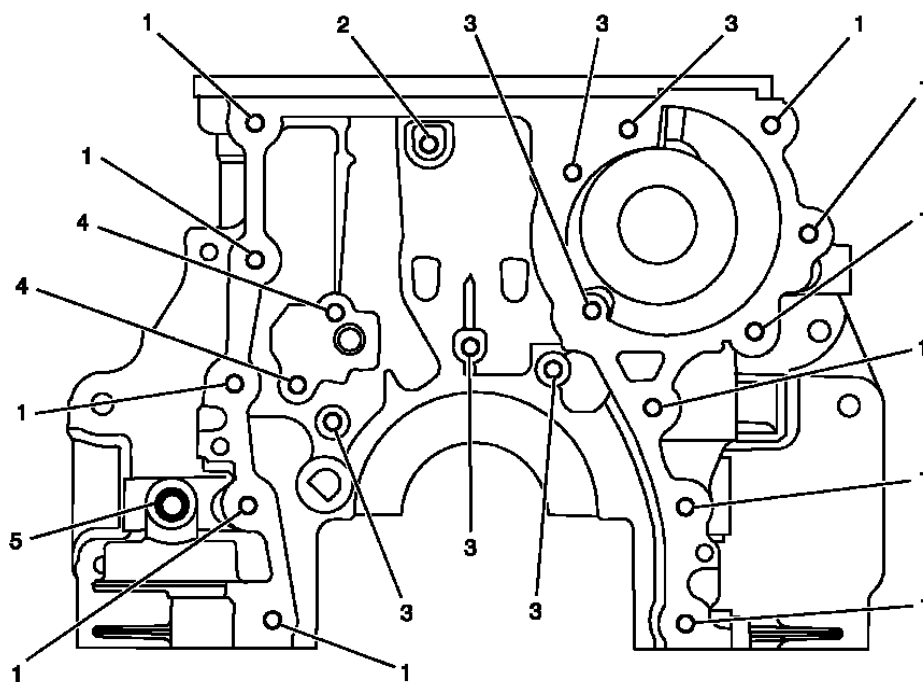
Crankshaft Rear Oil Seal & Housing Bolts
